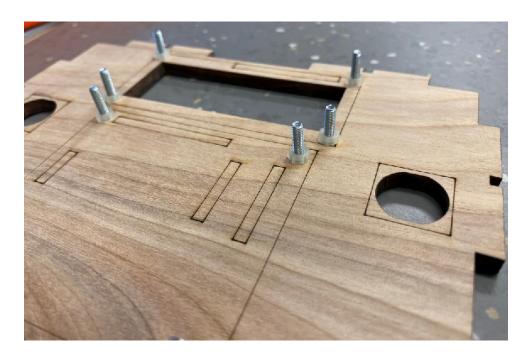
Mounting for the LCD display and PCB using machine screws.
